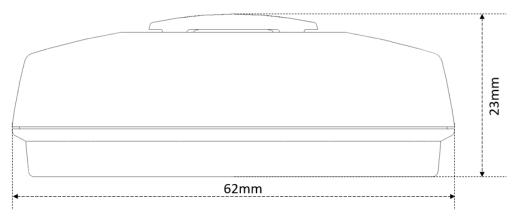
Modbus Gas and TrueVOC Sensor Dimension - Side View Flush Mount
